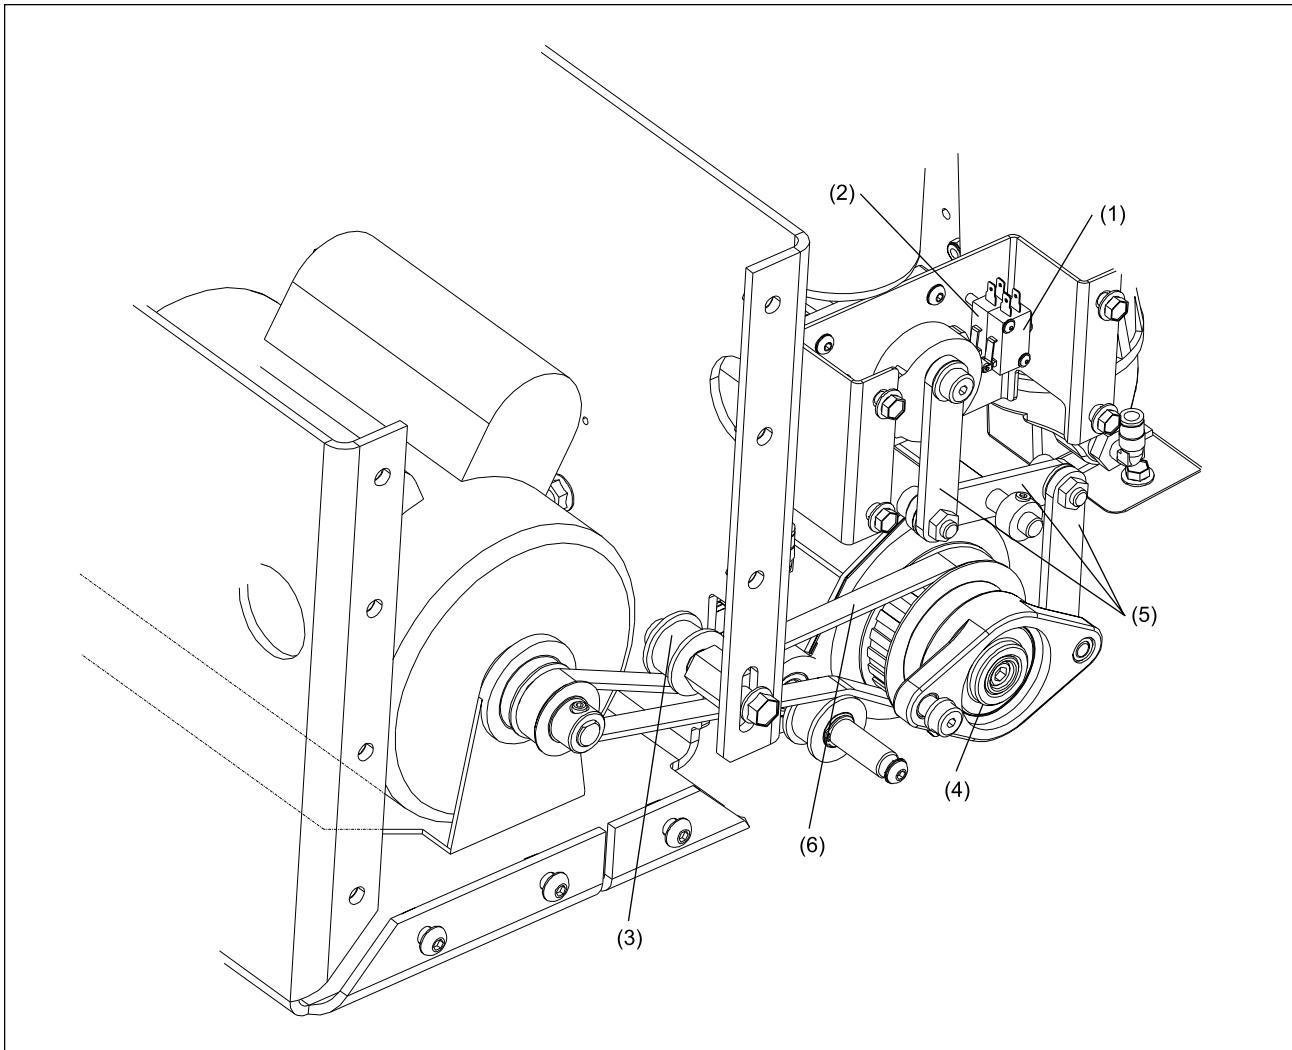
Adjusting Buffer Belt Tension, Replacing Buffer Up/Down Switches, Lubrication Buffer Brush Bearings and Lubricating Brush Lifting Assembly
